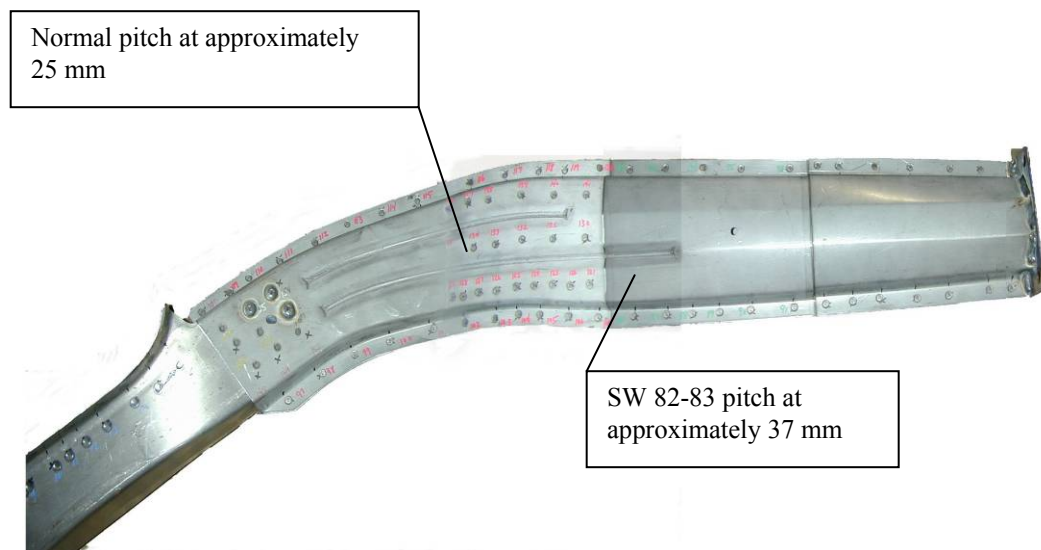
A portion of the right-hand rail assembly showing spot pattern layout prior to crash testing. This view does not include the rail length extending under the floor pan of the body.
